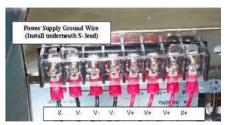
Power Supply Interface Harness Wiring to Power Supply
